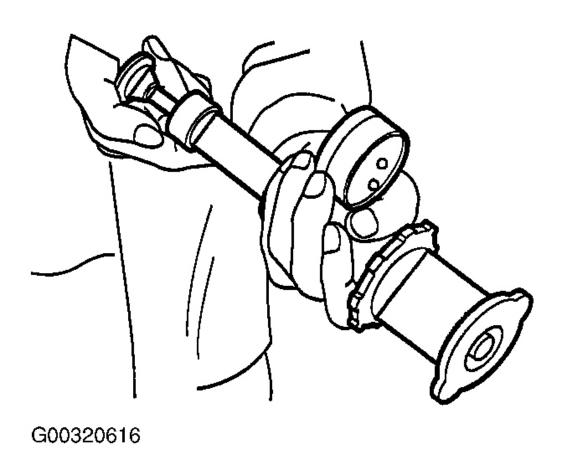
Testing Radiator Cap Courtesy of KIA MOTORS AMERICA, INC.
